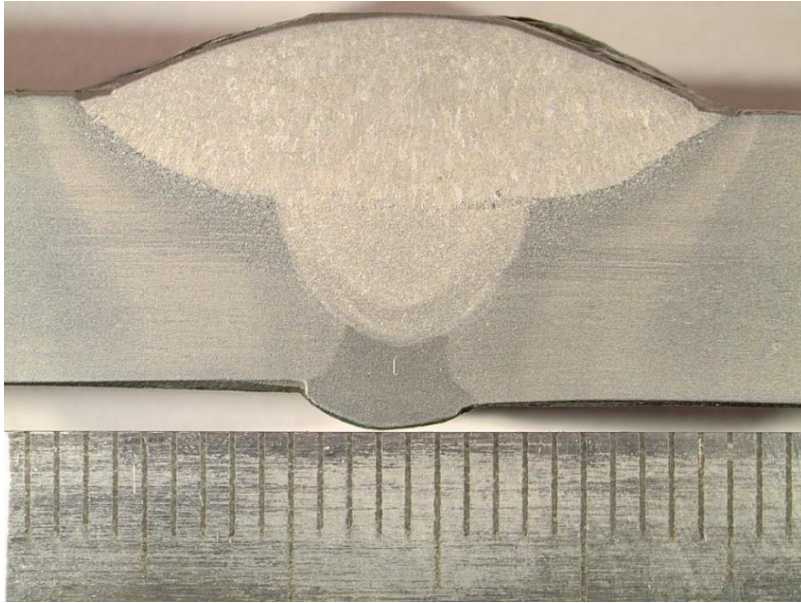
The macrostructure of the weld metal (root filling layer + layer + cladding layer): DC reverse polarity without MP.
